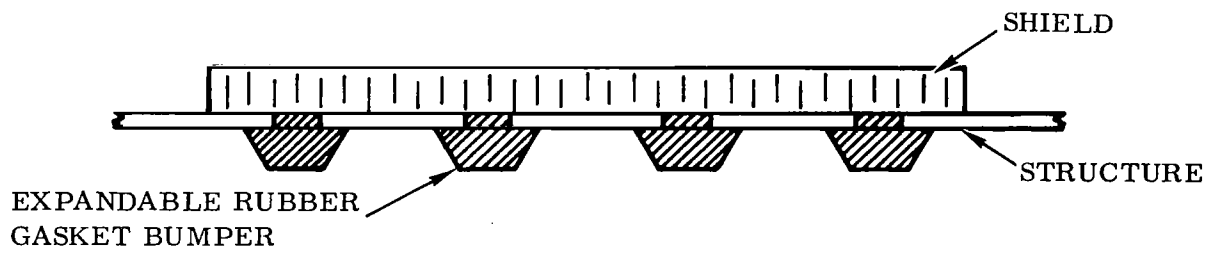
Illustration of "Expandable Bumper Gasket" Fastening
